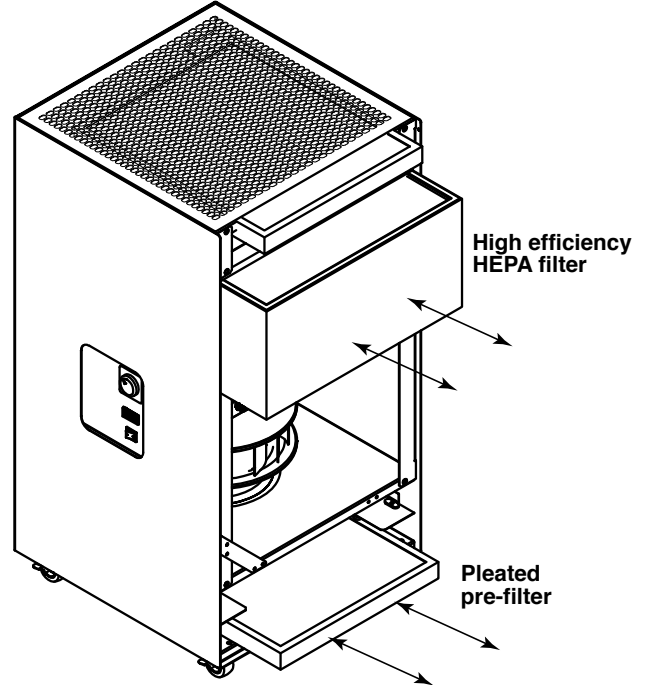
HEPA FILTER LOCK & UNLOCK
